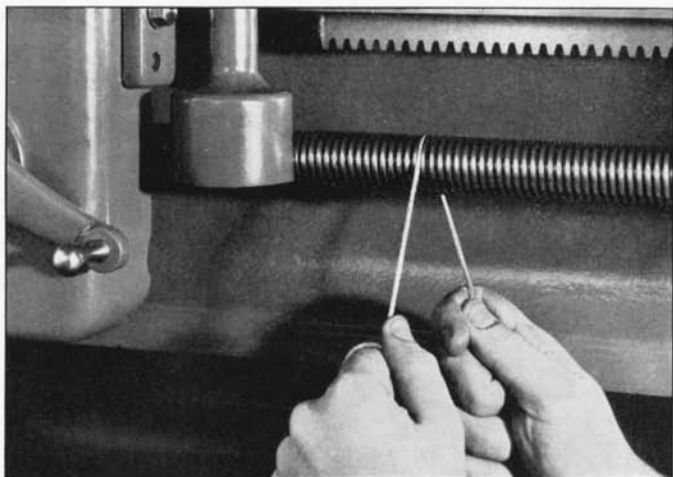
Cleaning the threads of the lead screw with a cord in the thread groove.
